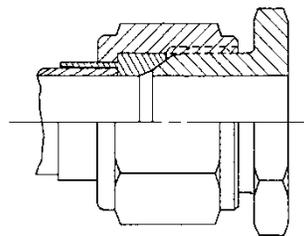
STANDARD FERRULE, BRAZED FLARED FITTING
